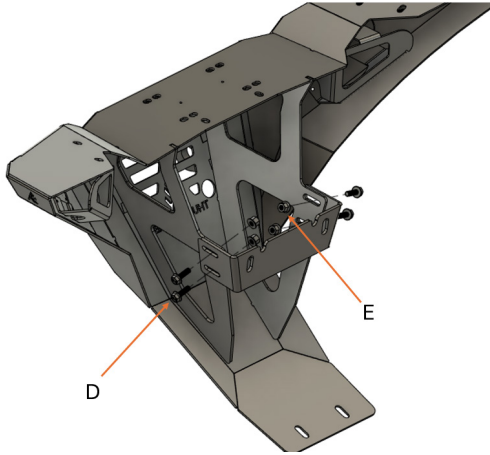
Loosely mount the Bumper Body to the Middle Mount using a 13mm Socket and Wrench
